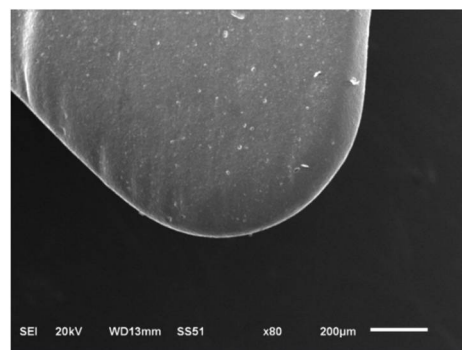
SEM images of unused cutting tool edge before turning process ($r=500$ µm)
